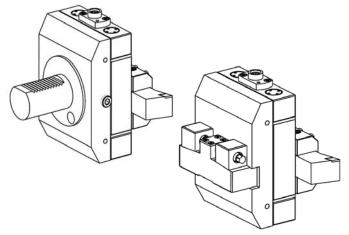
Dynamometer Type 9129AA with machine adapter Type 9129AB40 (left) and Type 9129AD25 (right) and tool holder Type 9129AE25
